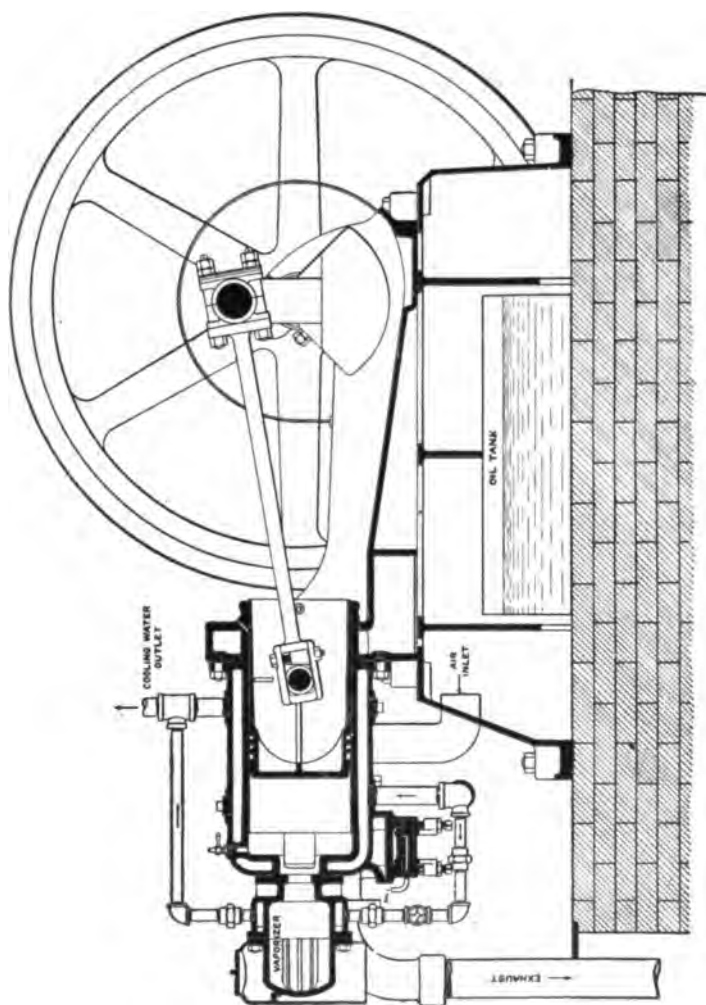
Cross-section Hornsby-Akroyd Oil Engine.
